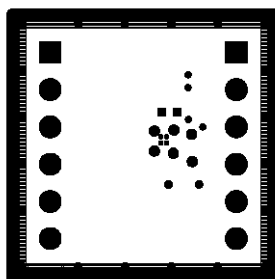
SMP-TPS7A3001-MVK Board Solder Mask – Bottom Side
